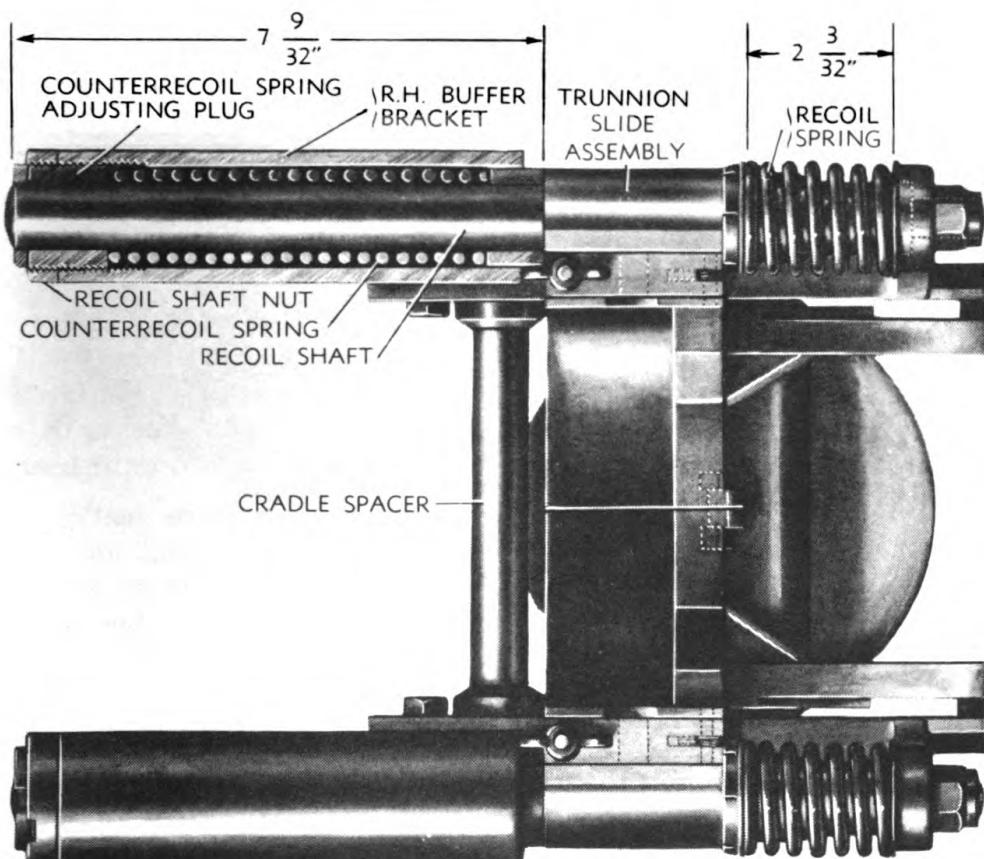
Adjusting Upper Buffer Counterrecoil Spring —
